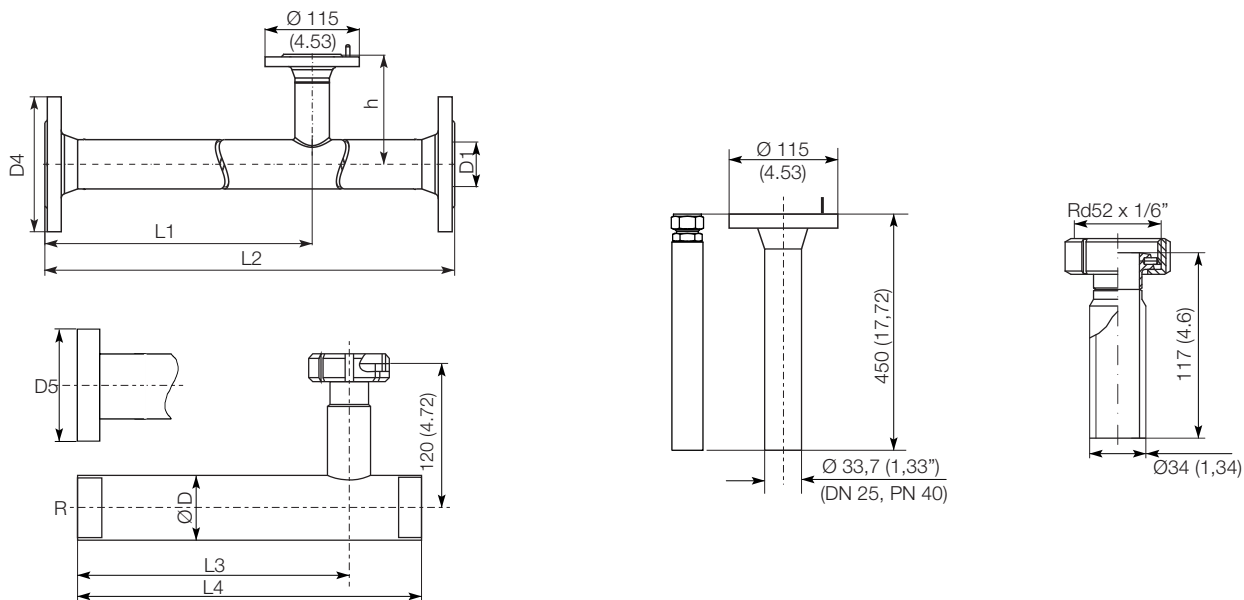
Dimensions pipe components and weld-on adapter
